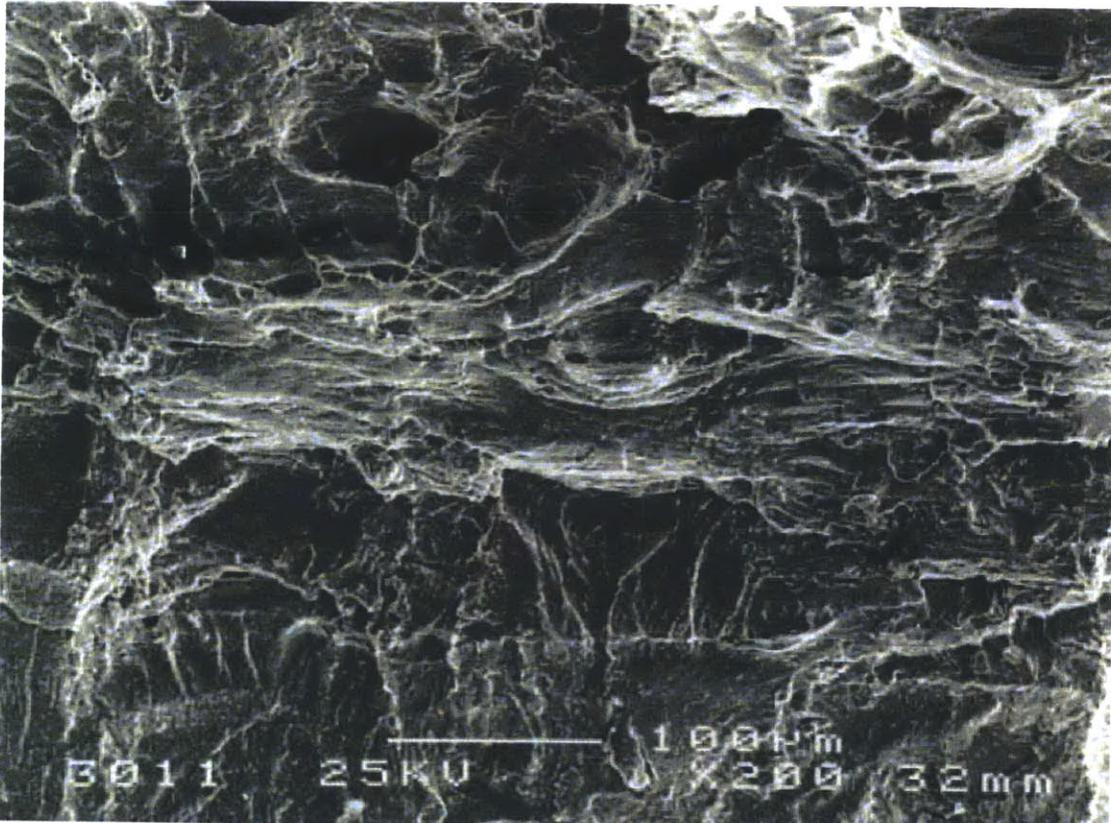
Fractography from a slow strain rate study on welds by [64] clearly shows brittle region at the onset of fracture toughness testing.
